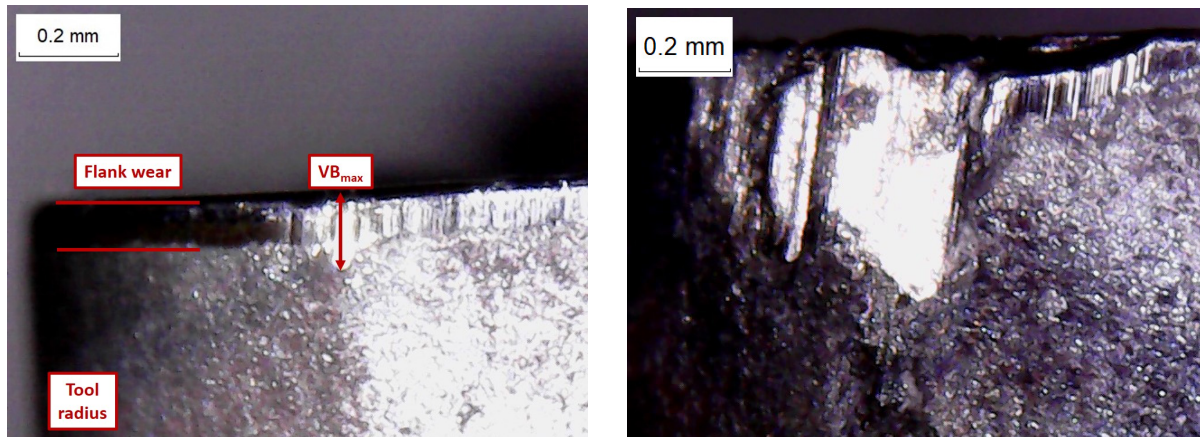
Flank face at machining time 1.92 min. Figure 7. Flank face of the worn tool (final state).
